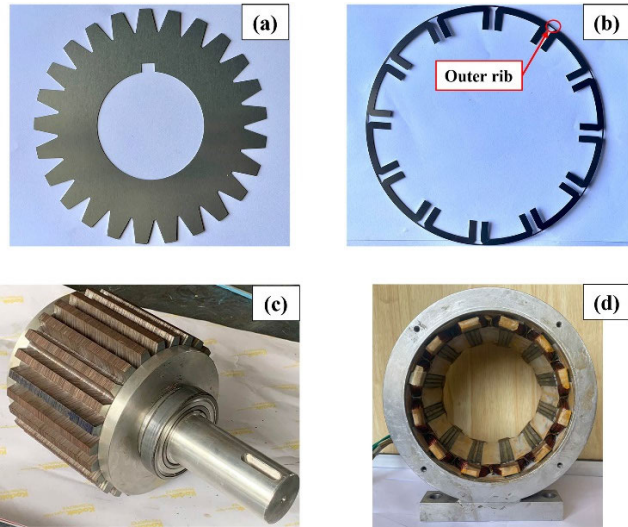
The 6-phase 12/25 C-core SFPM generator prototype. (a) Rotor lamination. (b) Stator lamination. (c) Rotor. (d) Stator.
